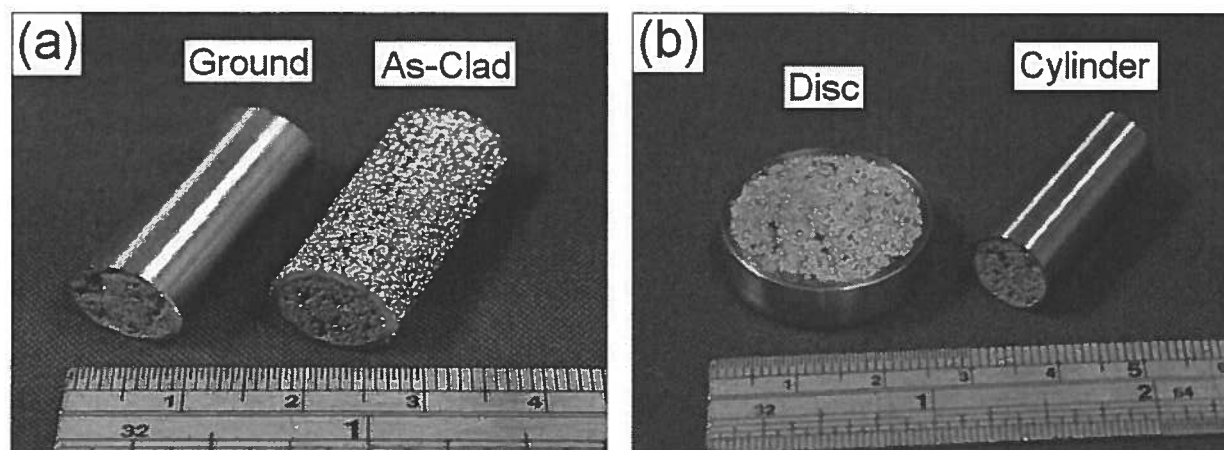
a) Examples of Ti-6Al-4V laser-clad Ti foam specimens before and after machining; and b) different shapes of specimens.
